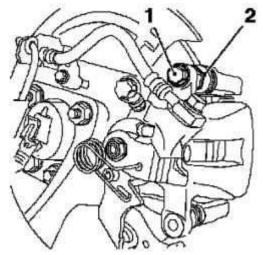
Guide pin: 1 - pin 2 - pin
